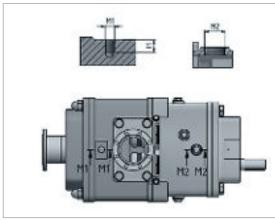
Thread sizes for lifting lugs (see table below for details)
